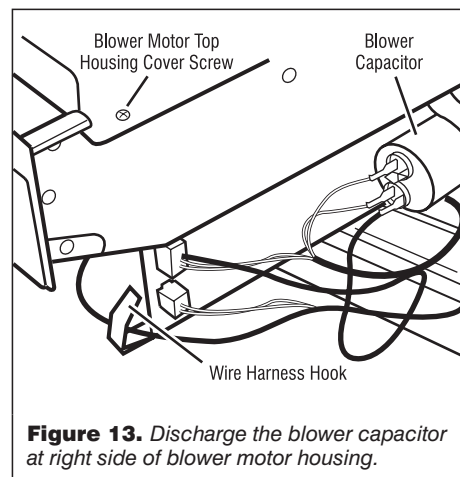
Discharge the blower capacitor at right side of blower motor housing.
